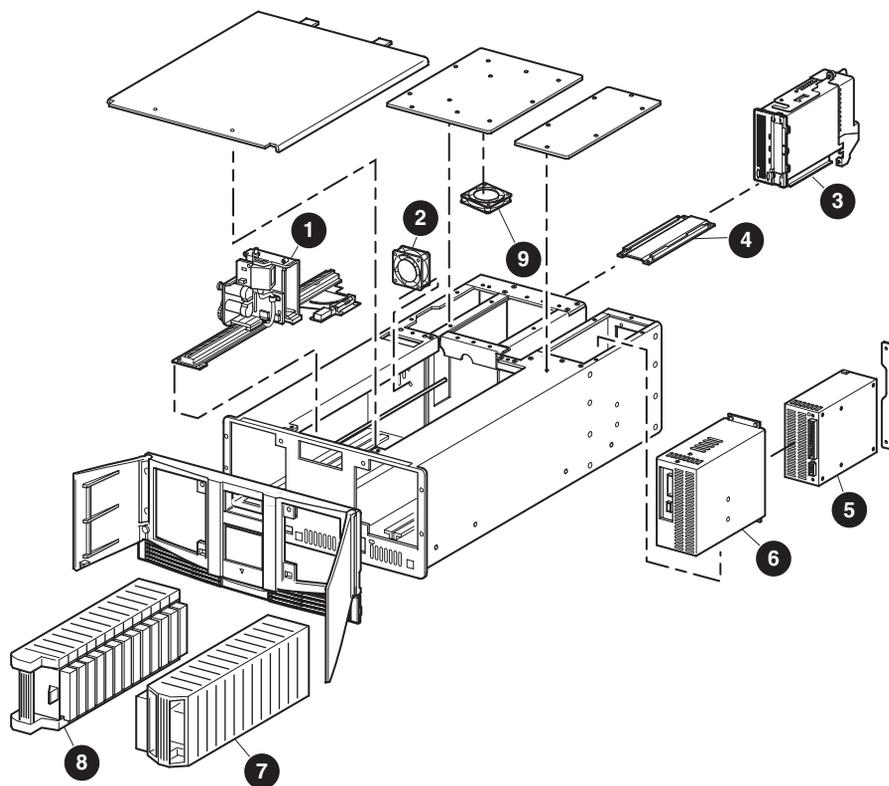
Electrical spare parts exploded view (two-drive 5U models)
